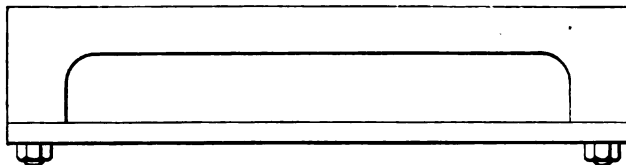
Piece shown in Fig. 22, made in Two Parts
